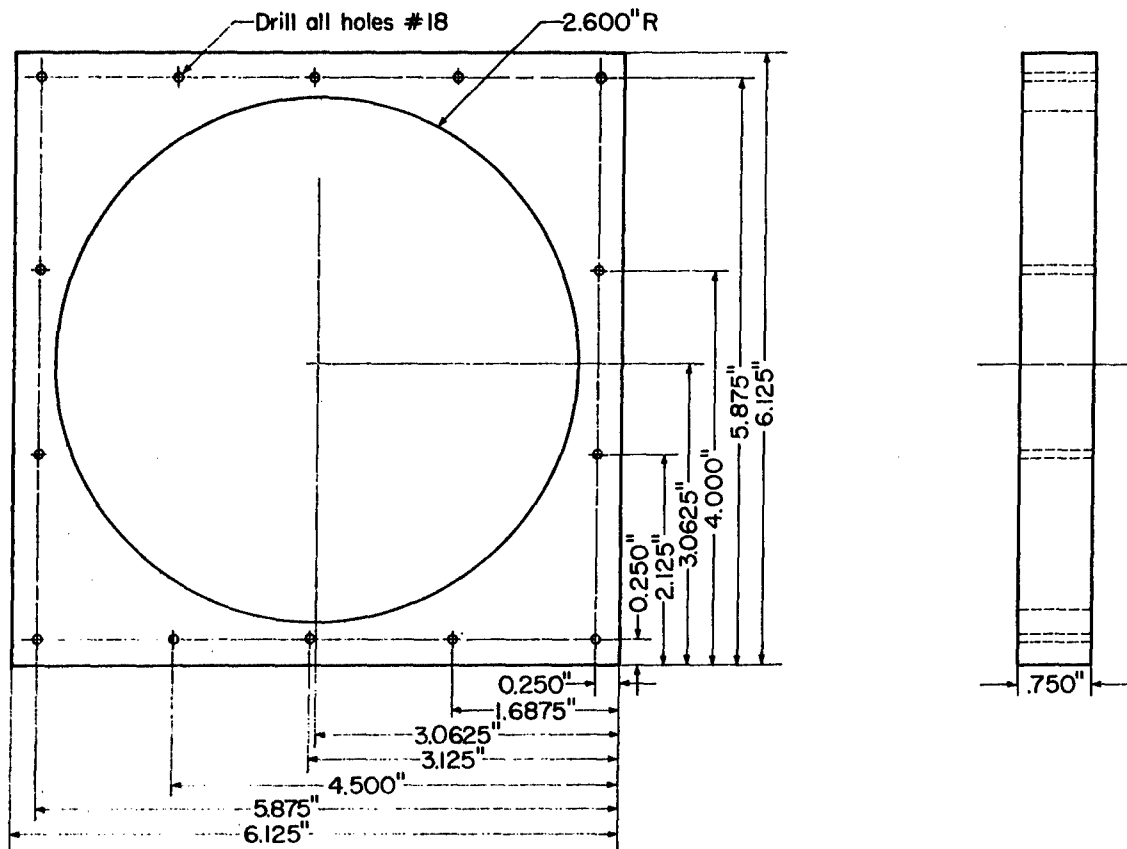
FILTER WHEEL - CHOPPER HOUSING
